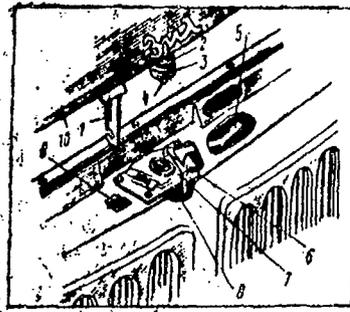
Hood Latch: 1, safety latch; 2, rod spring; 3, rod cup; 4, rod; 5, latching lever; 6, lever axis; 7, latch body; 8, lever spring; 9, spring with seat for safety hook; 10, hood
